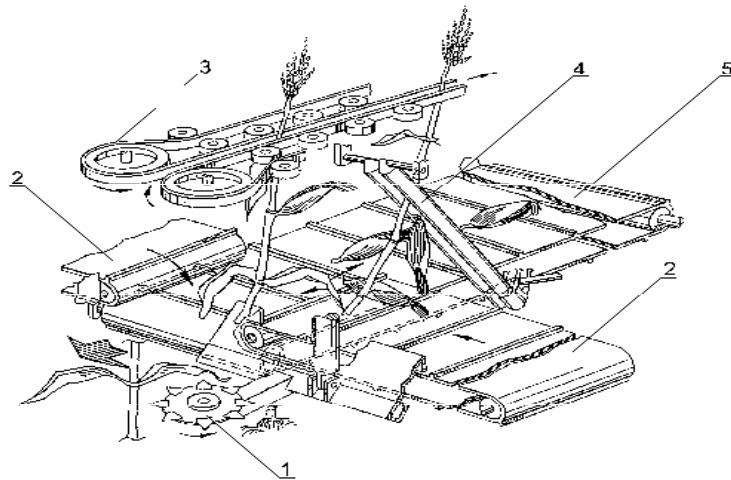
Corn cob cutting assembly: 1 – rotary knife head, 2 – transverse conveyor, 3 – set of stem guides, 4 – cob cut-off set, 5 – longitudinal conveyor [40]
